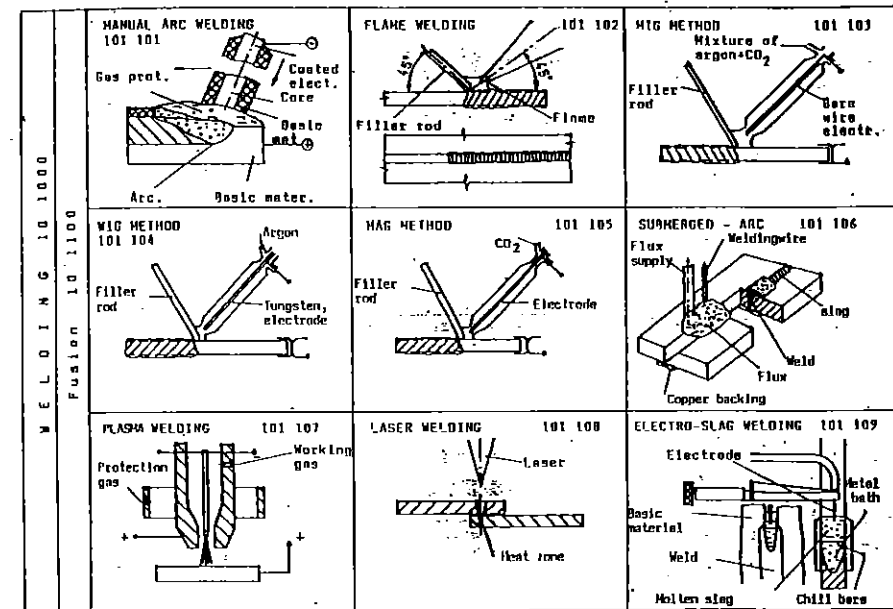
Illustration of a part of the classification processes for fusion welding
